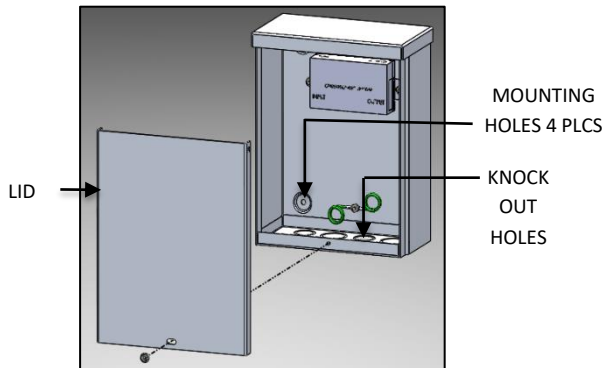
REMOTE DRIVER BOX ASSEMBLY FOR 24, 36, 48 AND 60 MODELS
